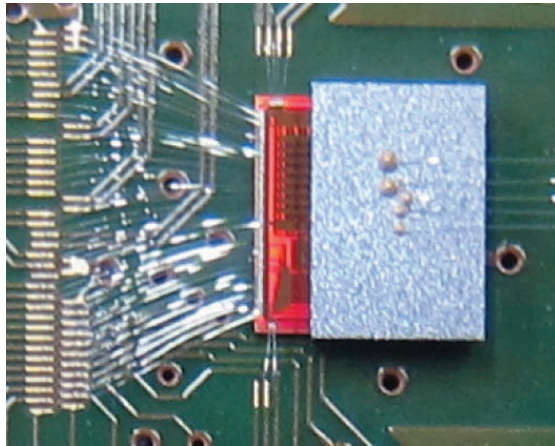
A pixel assembly with the sensor bump-bonded to the ToPix3 readout chip [14].
